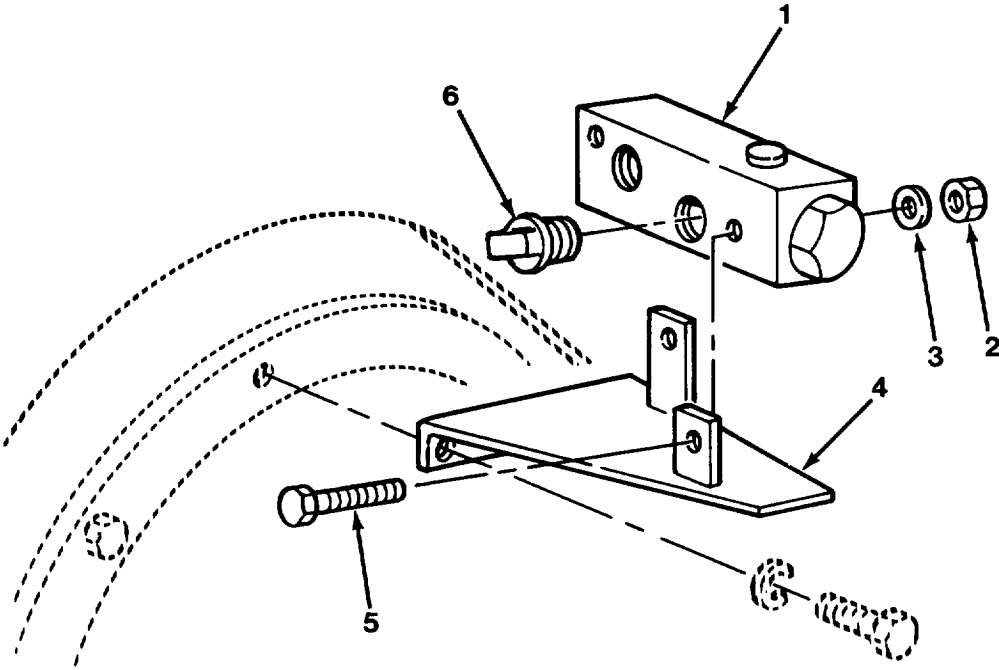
CROSSOVER RELIEF VALVE ASSEMBLY
